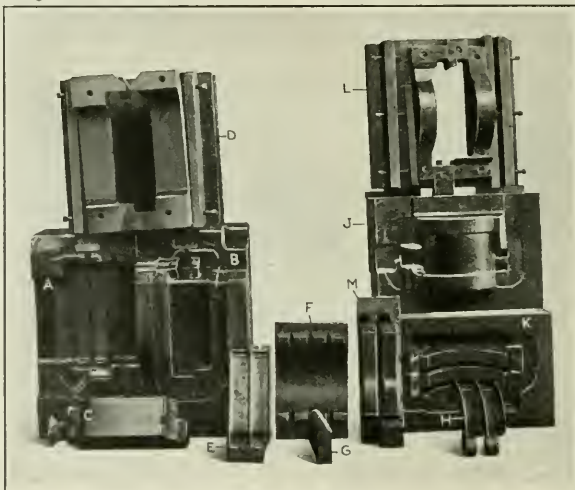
Dies for Drop-forging the Brake-shoe shown in Fig. 3
